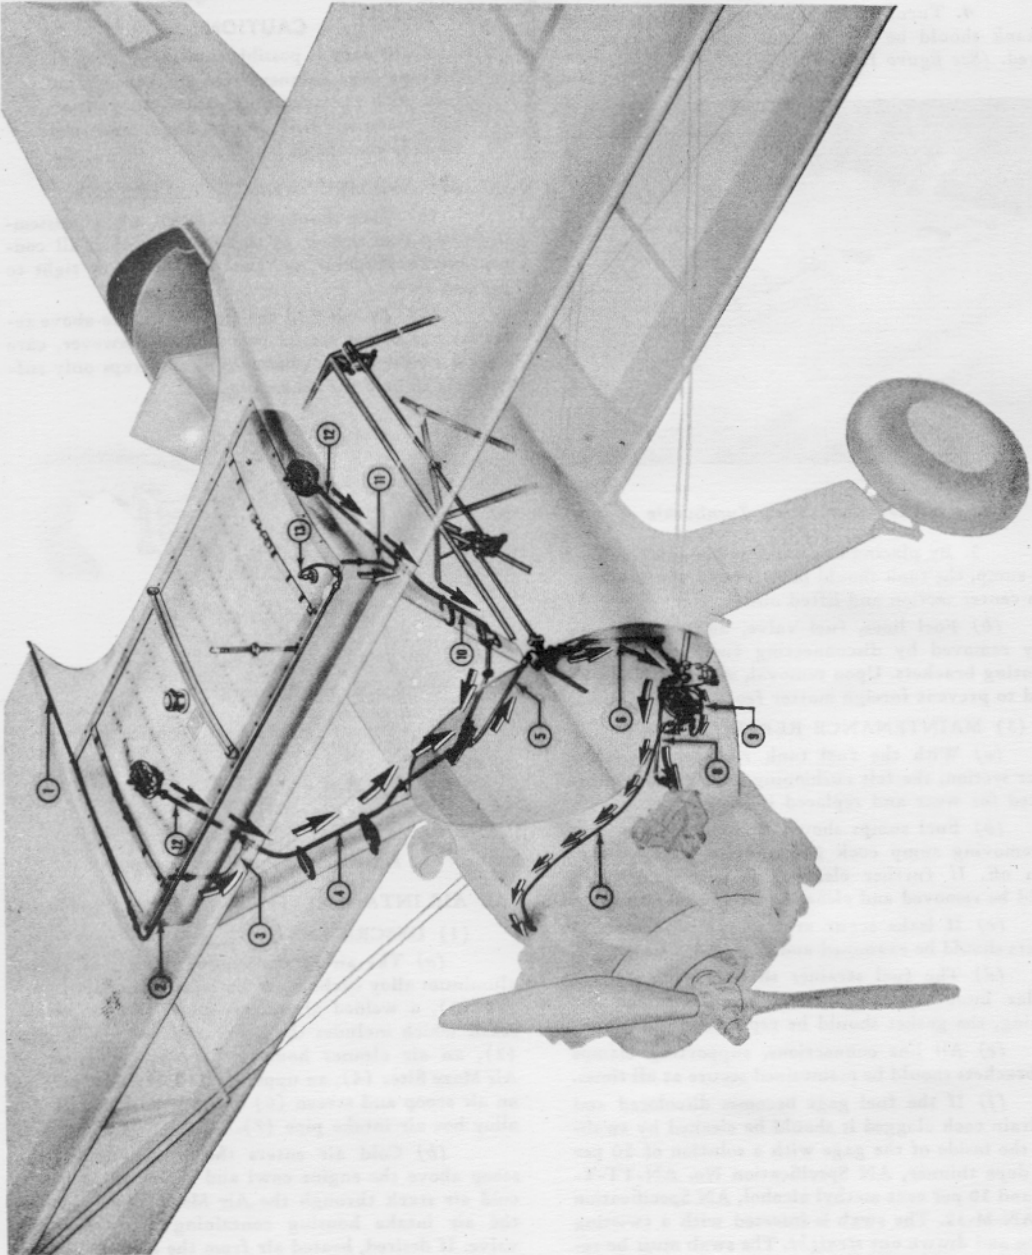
Fuel System Diagram and Tubing Identification Chart (Sheet 1 of 2 Sheets)
